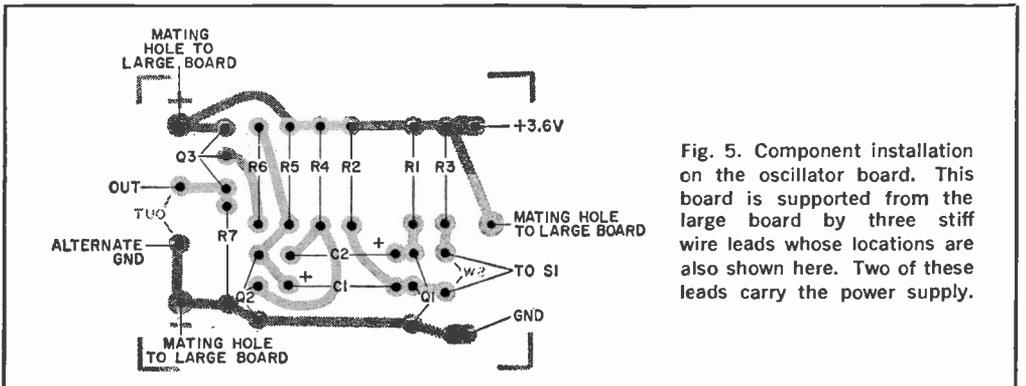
Component installation on the oscillator board. This board is supported from the large board by three stiff wire leads whose locations are also shown here. Two of these leads carry the power supply.
